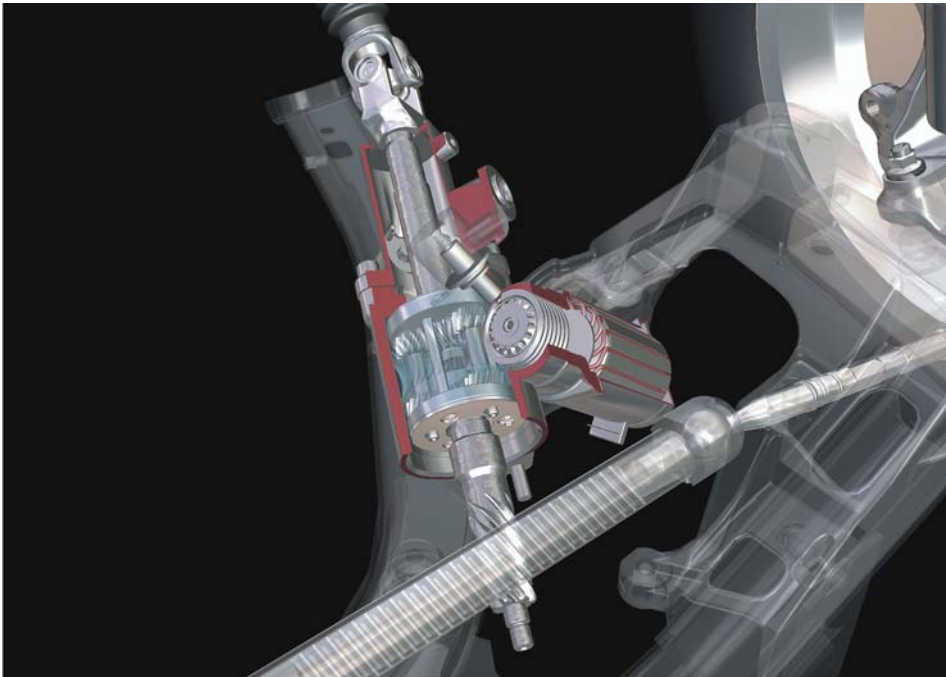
Servo-assisted steering incl. servo motor and interactive gearbox in sectional view
